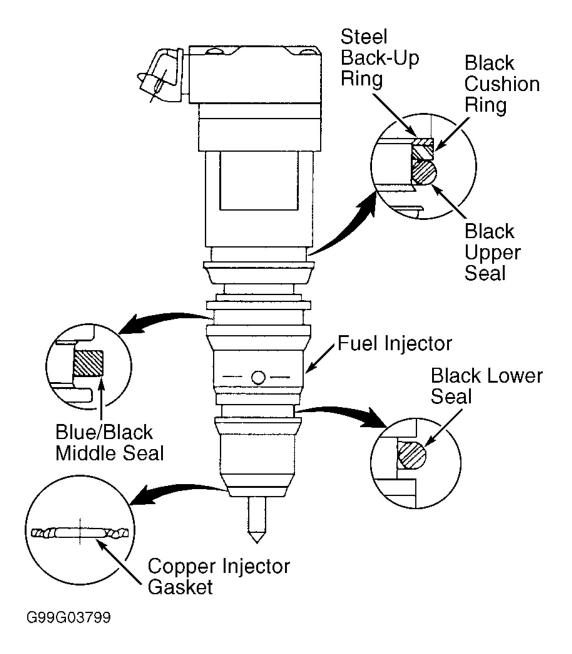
Locating Back-Up Ring, Cushion Rings, Seals & Copper Washer On Fuel Injector Courtesy of FORD MOTOR CO.
